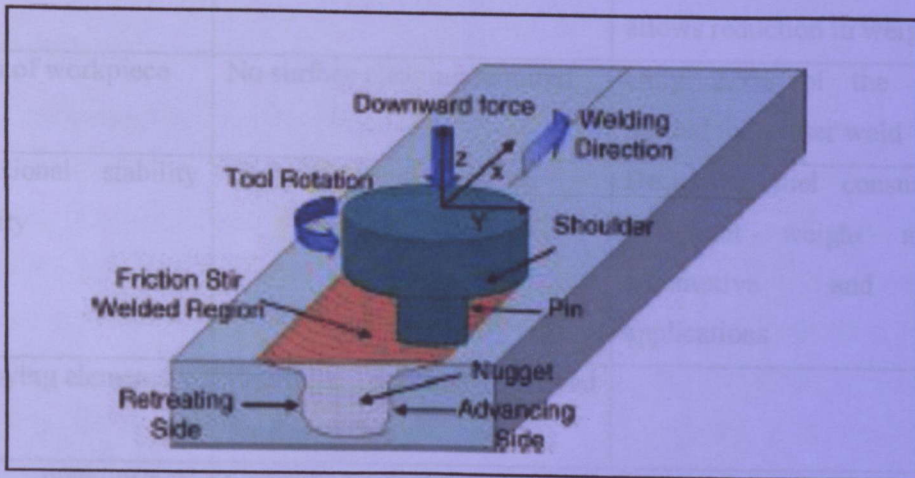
Schematic drawing of friction stir welding [3]
